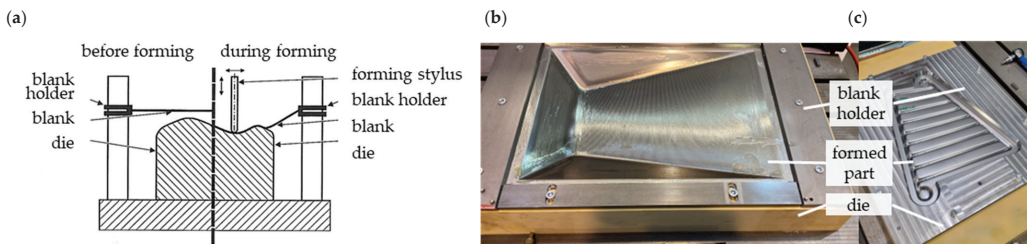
Incremental sheet forming: (a) process principle, (b) clamped outer sheet after forming, and (c) clamped inner sheet after forming.
